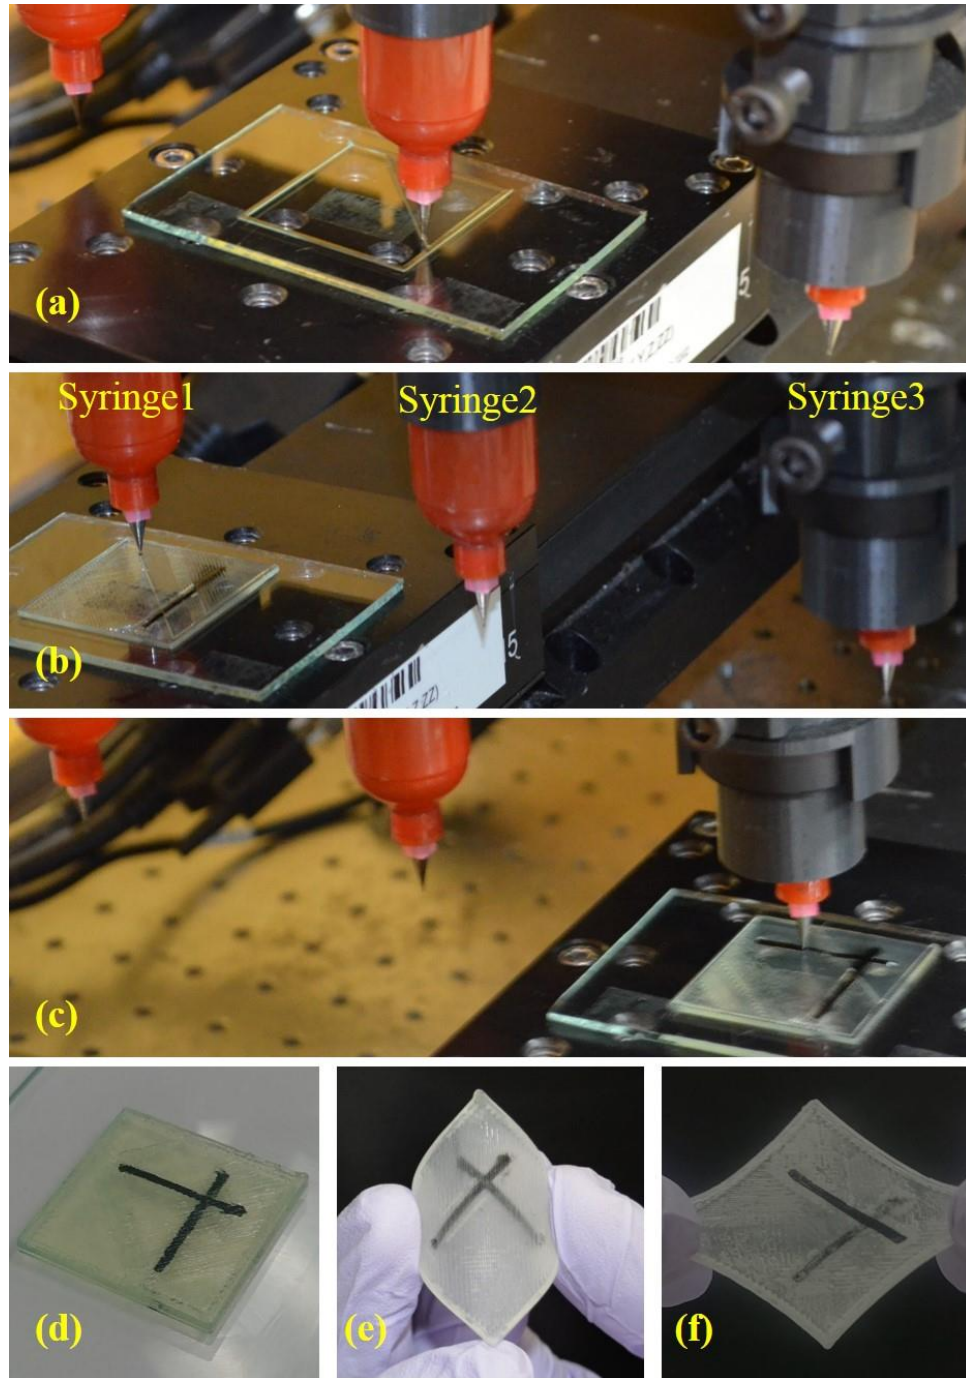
Multi-material direct-print process for a single-taxel sensor: (a) bottom layer printed using modified TangoPlus; (b) intermediate layer printed using modified IL/TangoPlus; (c) conductive electrode printing using modified CNT/prepolymer; (d) printed sensor before curing; (e–f) Cured flexible and stretchable sensor [132].
